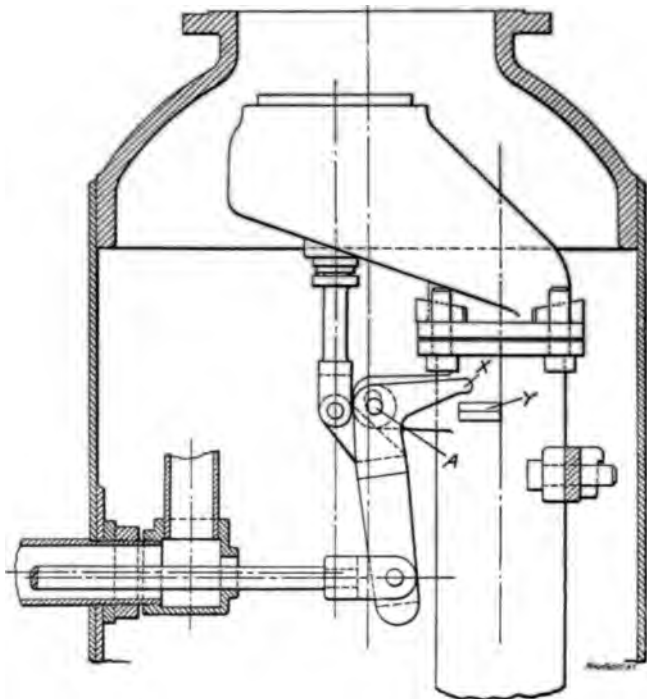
Section of Throttle Valve with Variable Fulcrum
